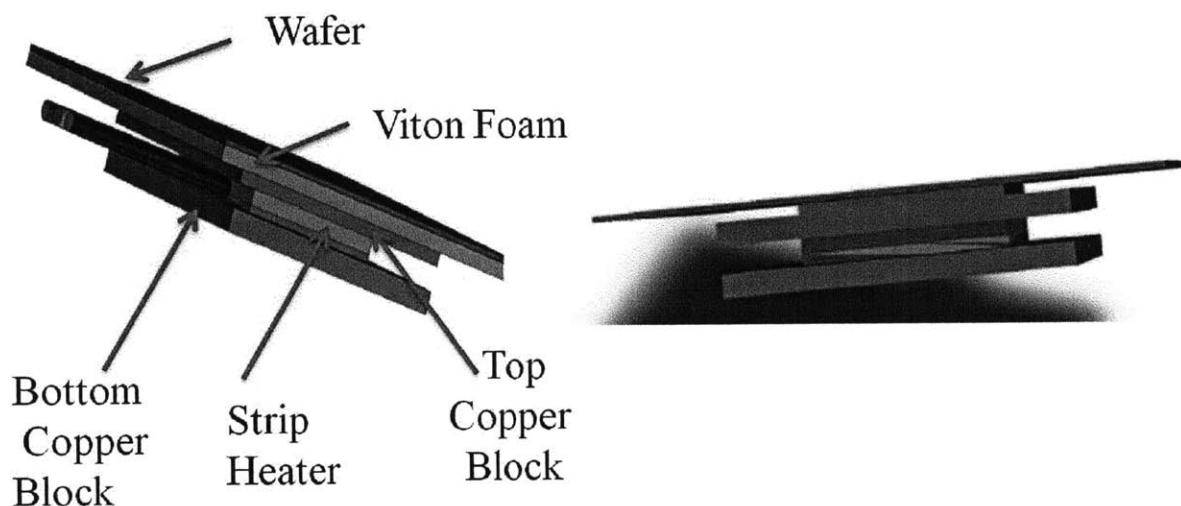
Schematic of Heater Assembly - Left: Isometric view; Right: Front View
